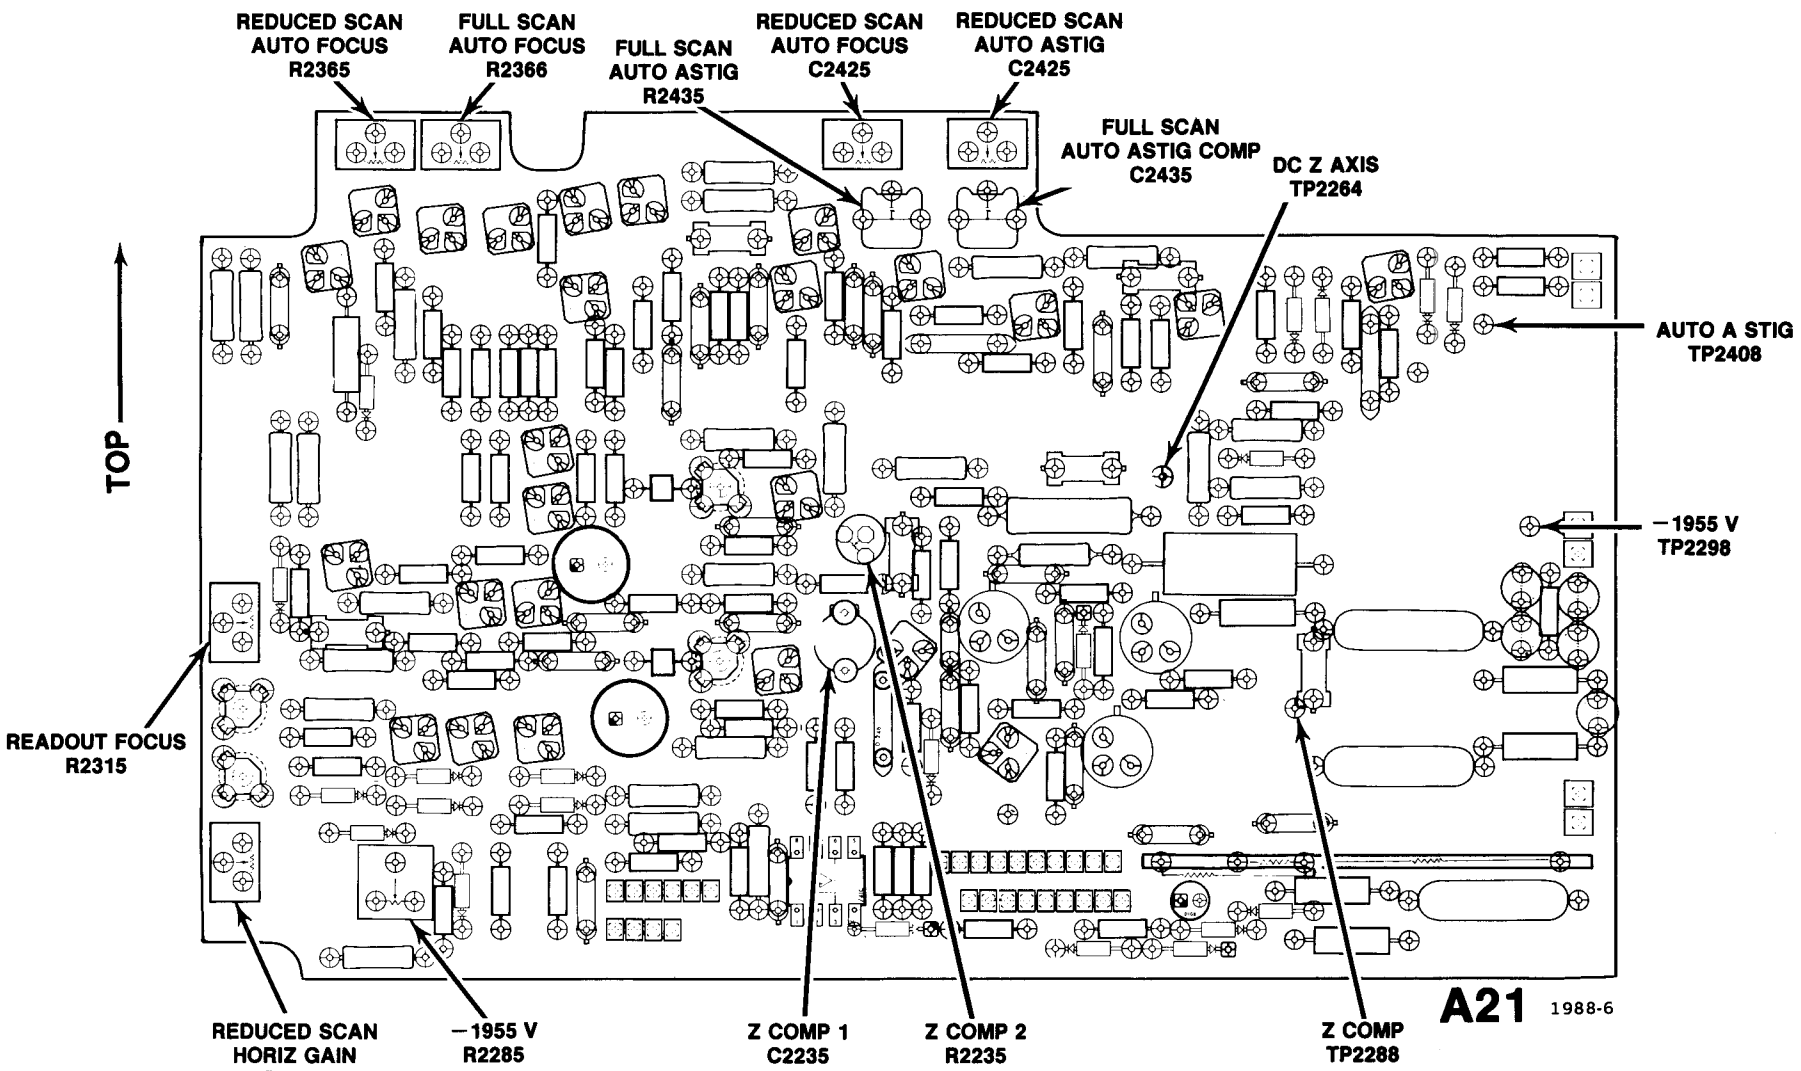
Z-Axis test points and adjustments on A21—Z-Axis Circuit Board.
